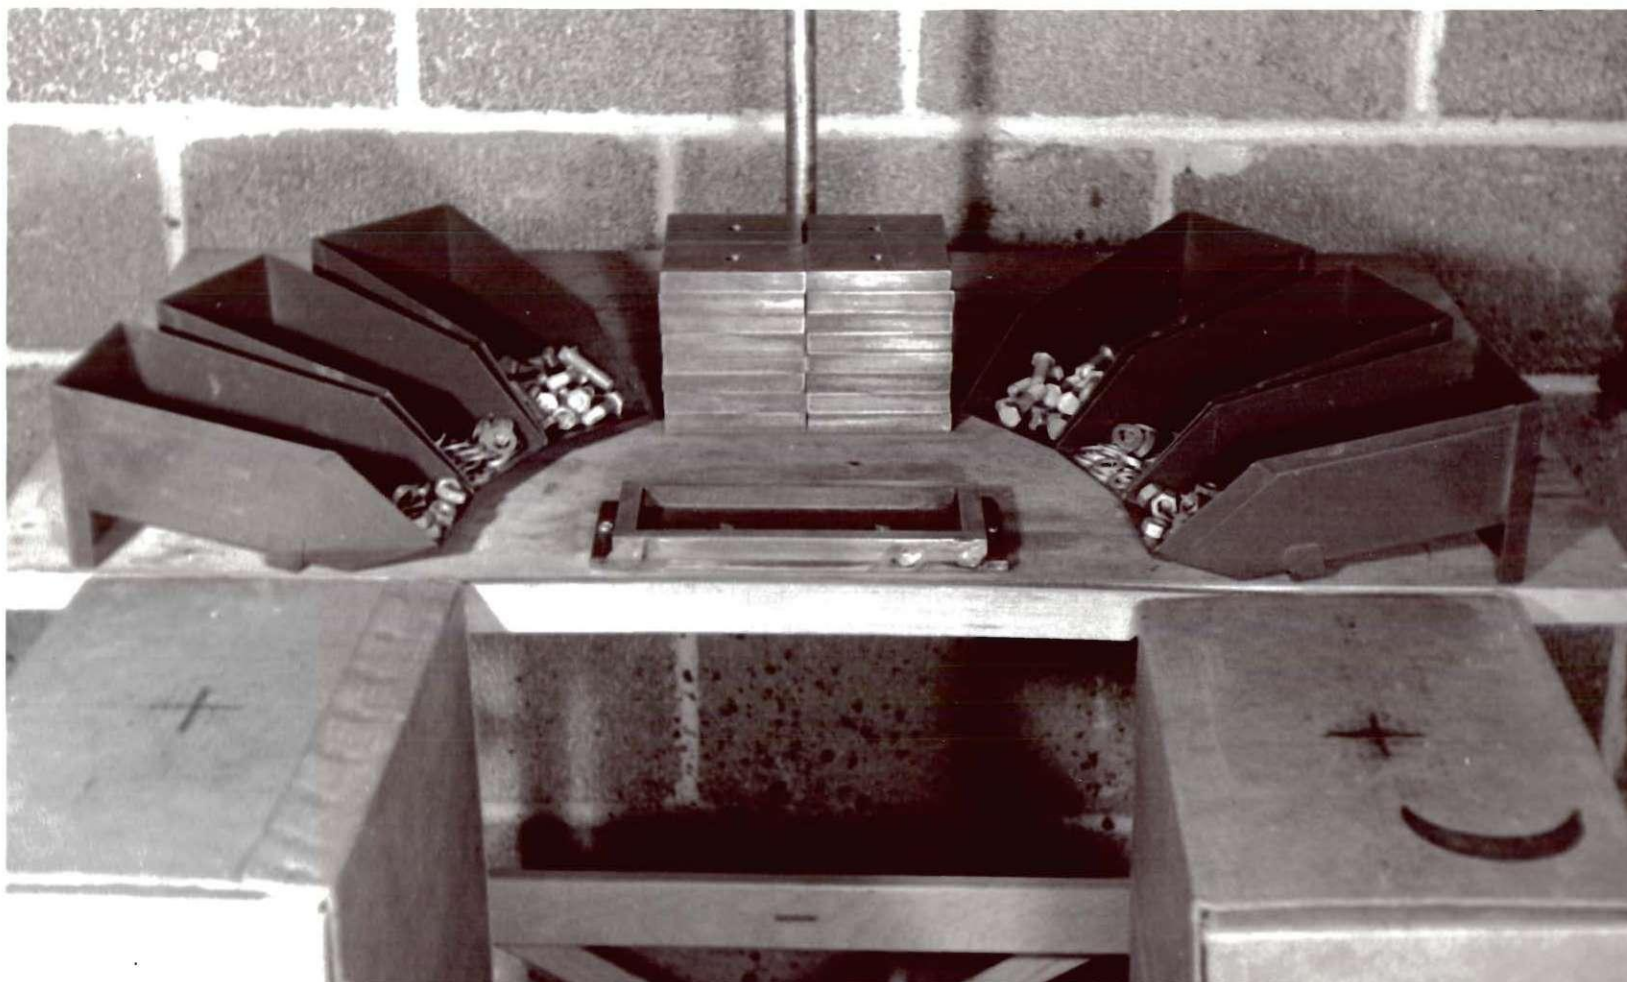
CLOSE UP OF COLD ROLLED STEEL PLATE ASSEMBLY
